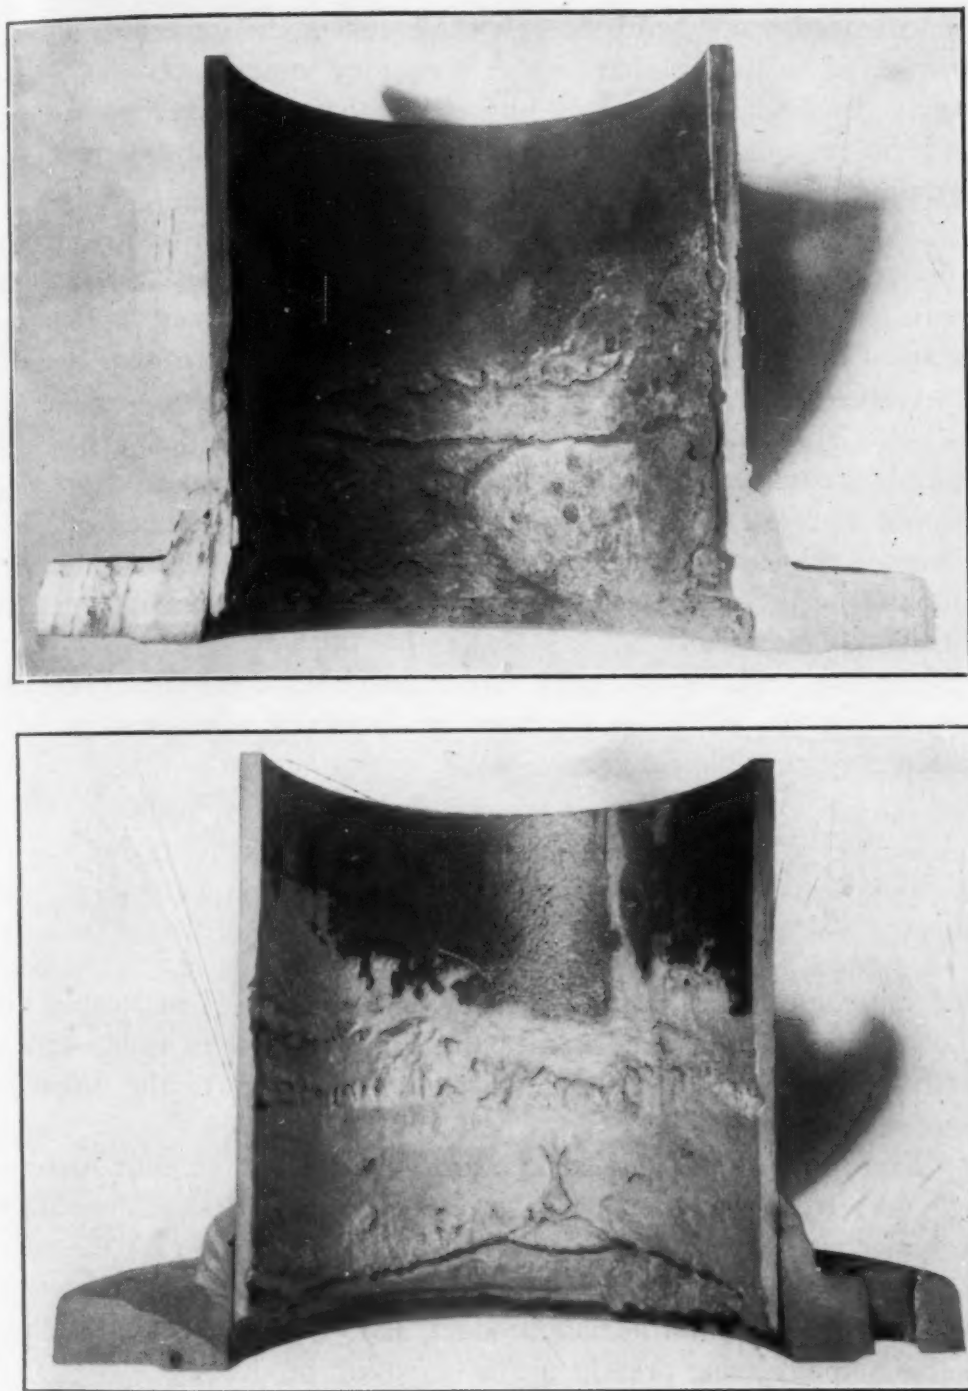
Corrosion of Pipe Section Welded to Flange. (Upper) Unetched. (Lower) Macroetched.
